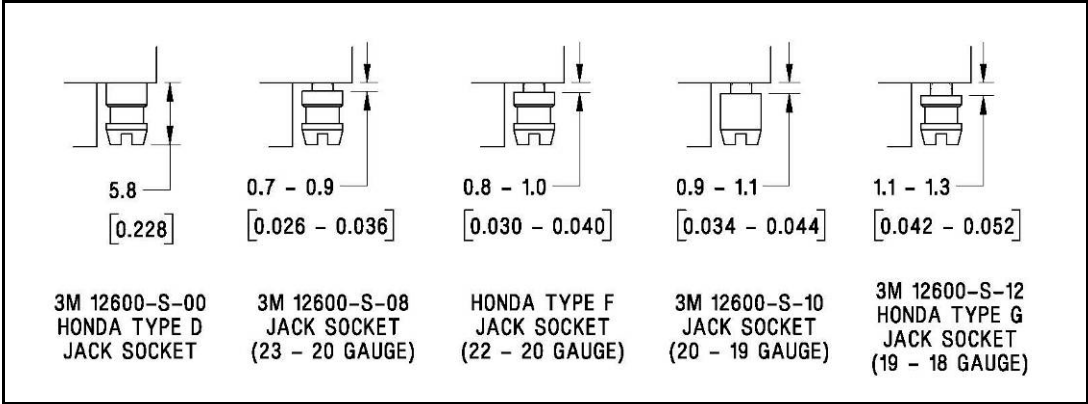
Camera Link Cable Threaded Fastener Requirements
